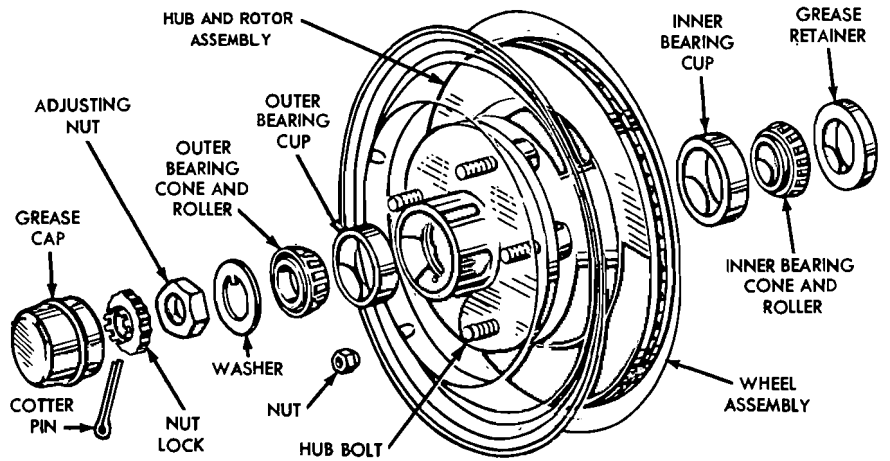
Front Hub Bearing and Grease Retainer-Disc Brakes—Typical
